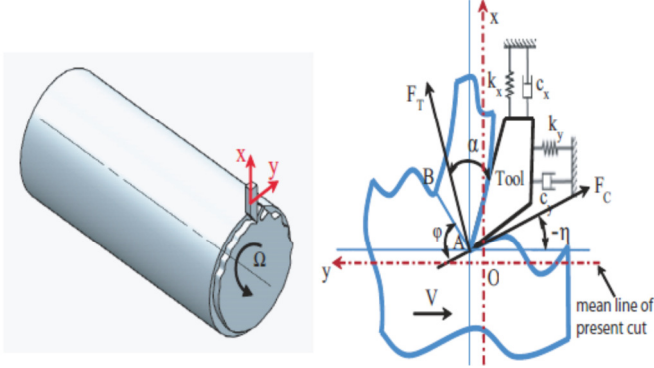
2-DOF MACHINE TOOL MODEL [13]
